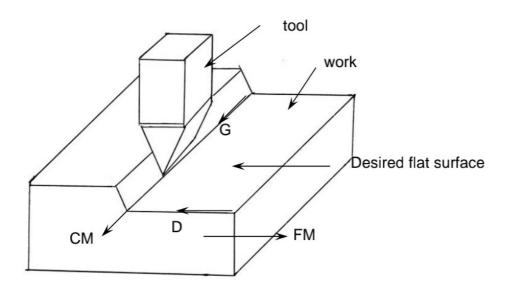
Principle of producing flat surface in shaping machine
